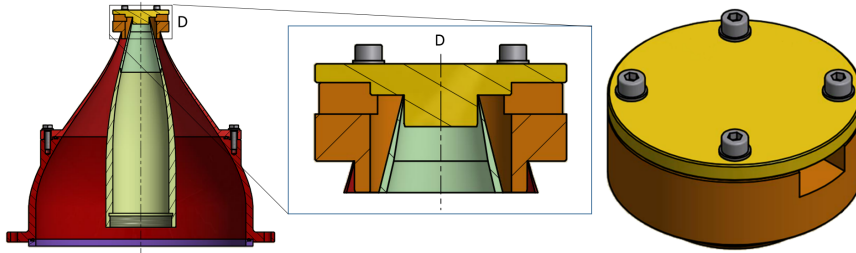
CAD drawings of the centering tool designed to ensure the coaxiality of the two nozzles.
